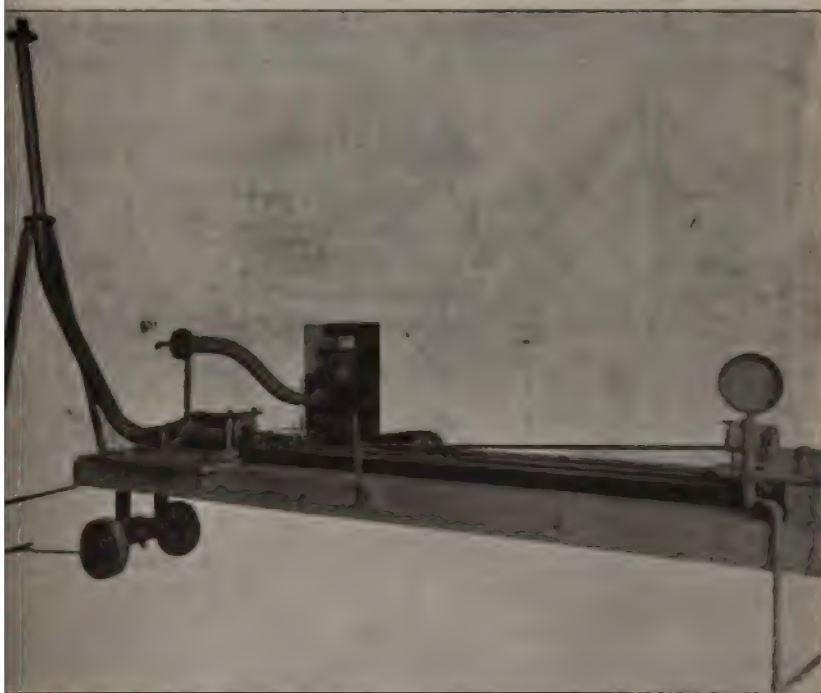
Lead-Lining Machine. Pulling Lead in 4-inch Copper Pipe.
